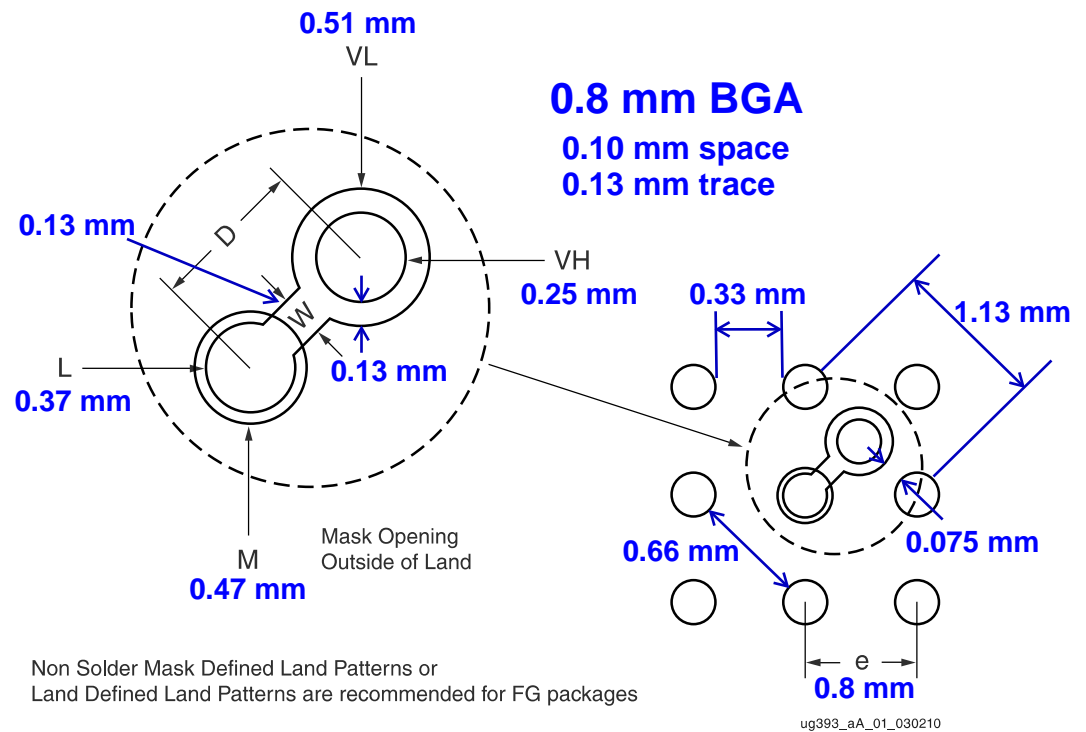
Suggested Board Layout of Soldered Pads for BGA and CSP Packages
